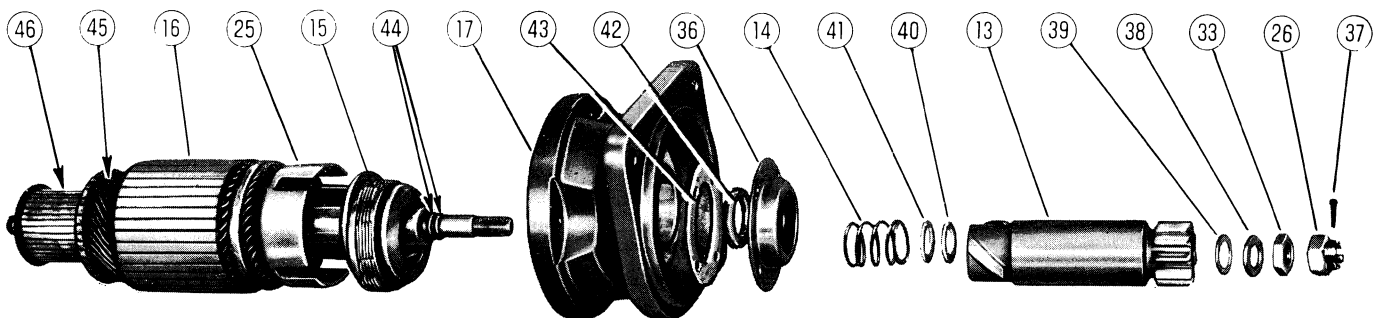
Exploded View of Armature and Starter Drive Assembly
